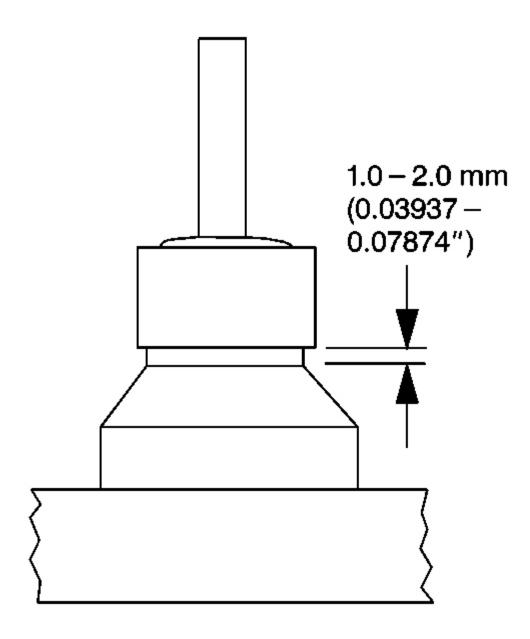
Valve Stem Oil Seal Proper Installation Position Courtesy of GENERAL MOTORS CORP.
